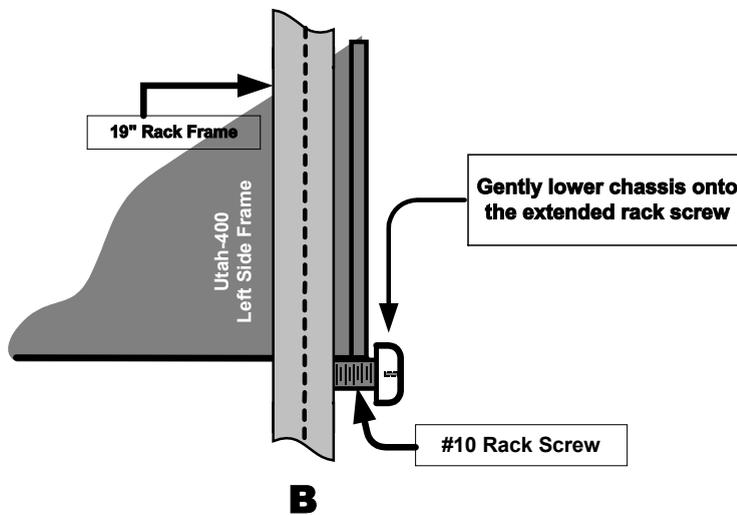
Lowering the Utah-400 Chassis on the Rack Screw.
